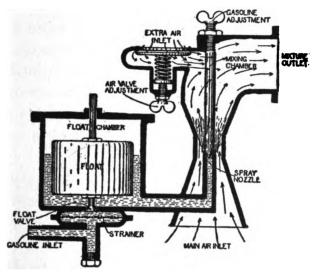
Compensating Carburetor, Side Float Chamber.
